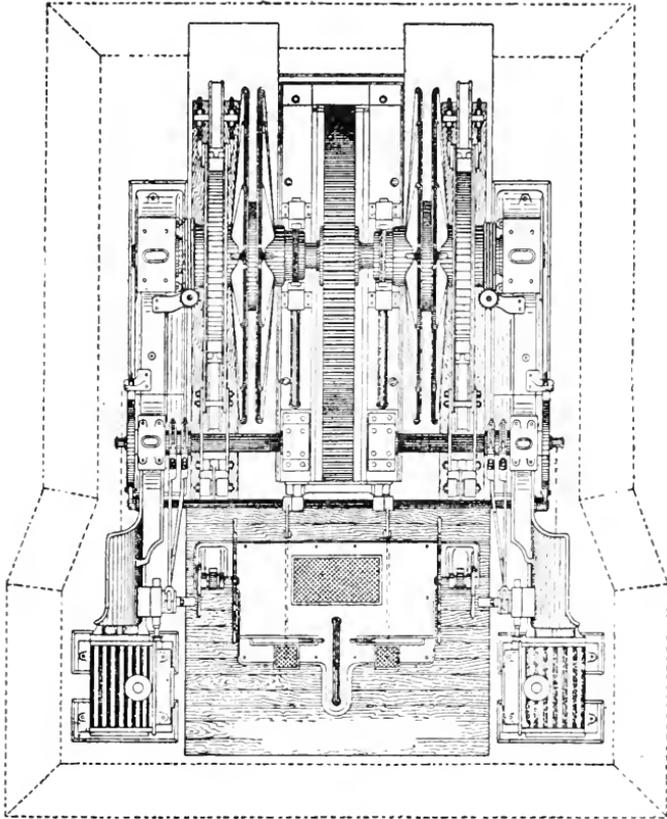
PLAN OF GEAR HOISTING ENGINE, AMERICAN PATTERN, FLAT ROPE DRUMS.
